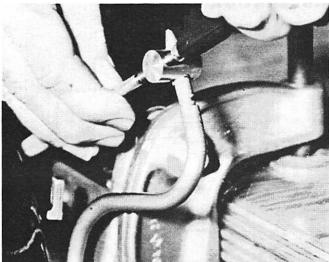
Placing Shift Cable on Holder Bar, Mark 20
